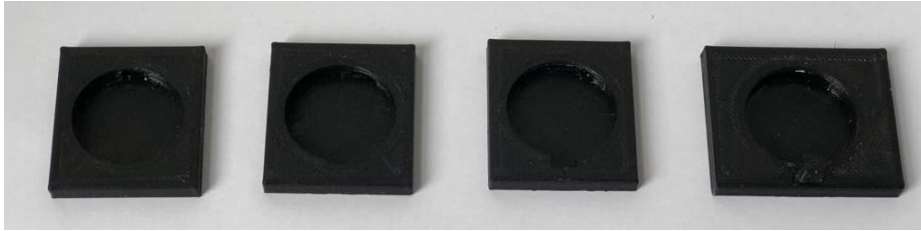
3D printed samples of the housings of the MAVIC tensioner with few dimensional variations. The one that achieved the most secured connection to the tensioner was selected and adapted in the socket design.
